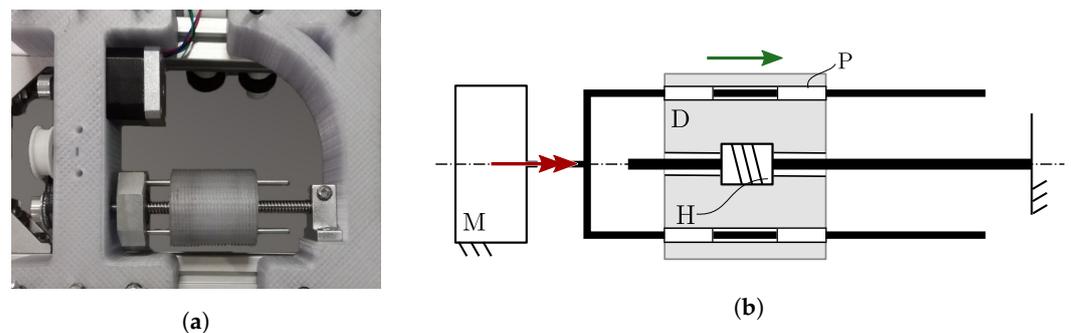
Winch with rototranslating drum. (a) Prototype of a winch with rototranslating drum. (b) The rotation of a pair of rods connected to the motor (M) makes the drum (D) rotate. Thanks to a nut/screw coupling (H), the drum can translate along the rods onto two prismatic joints (P).
